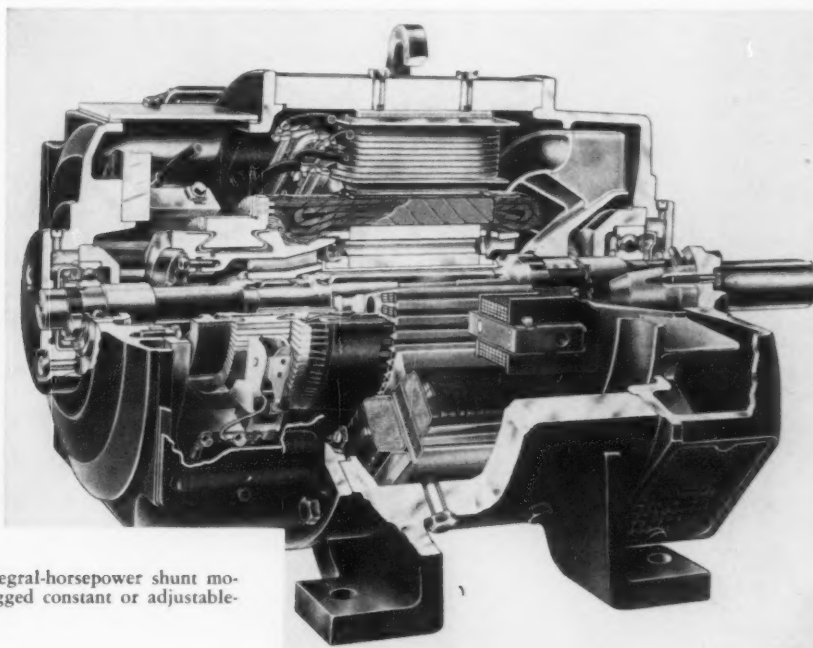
New dc integral-horsepower shunt motor designed for rugged constant or adjustable-speed service
